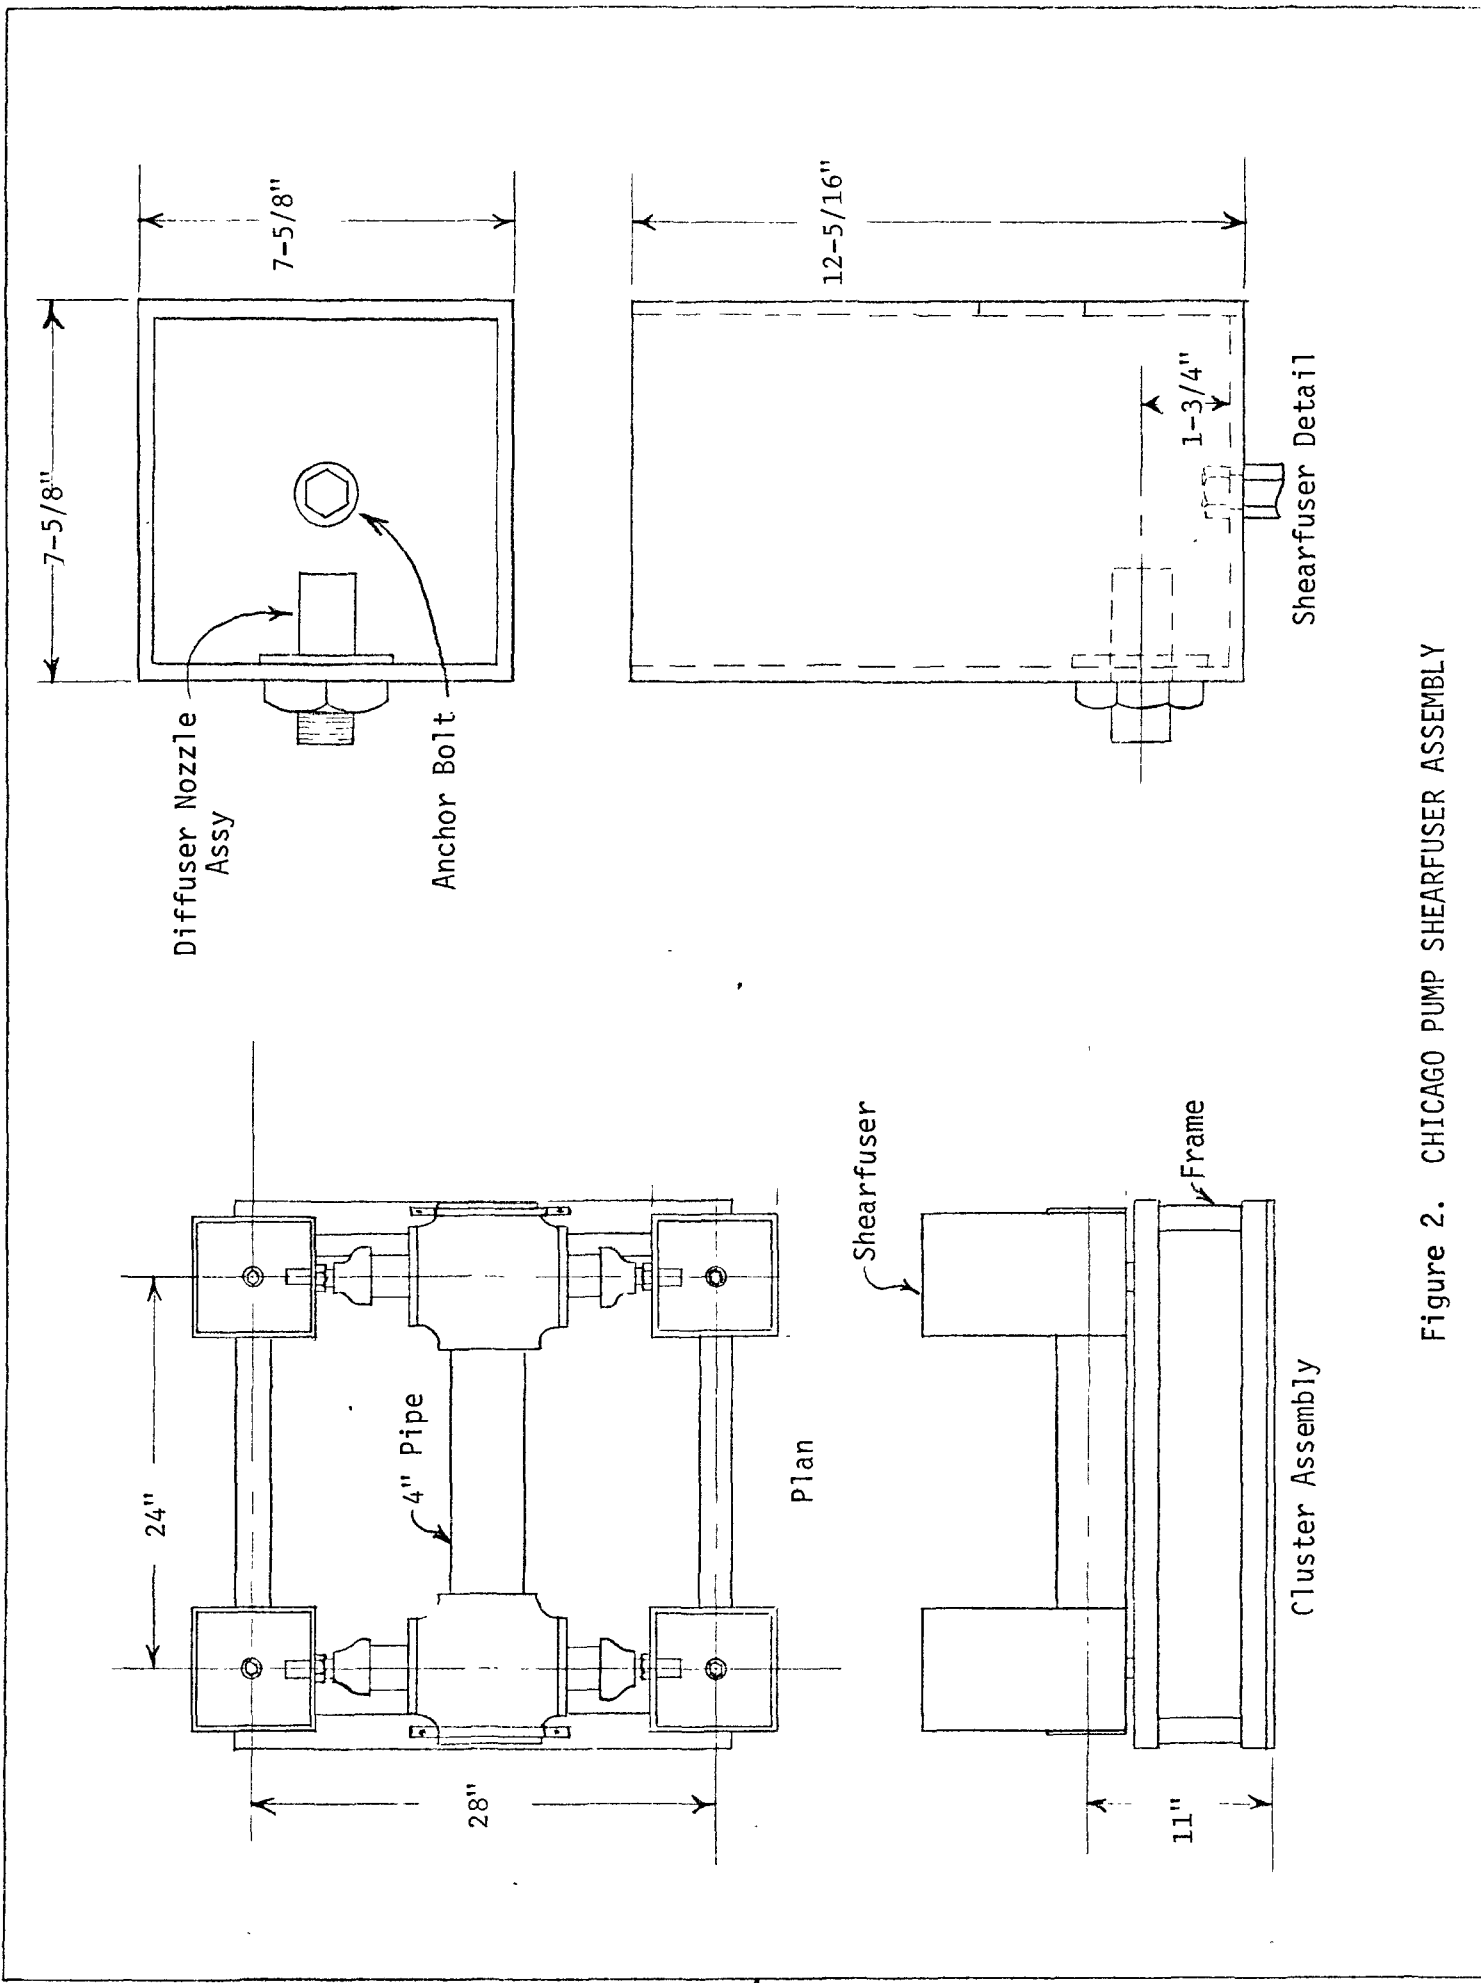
CHICAGO PUMP SHEARFUSER ASSEMBLY
